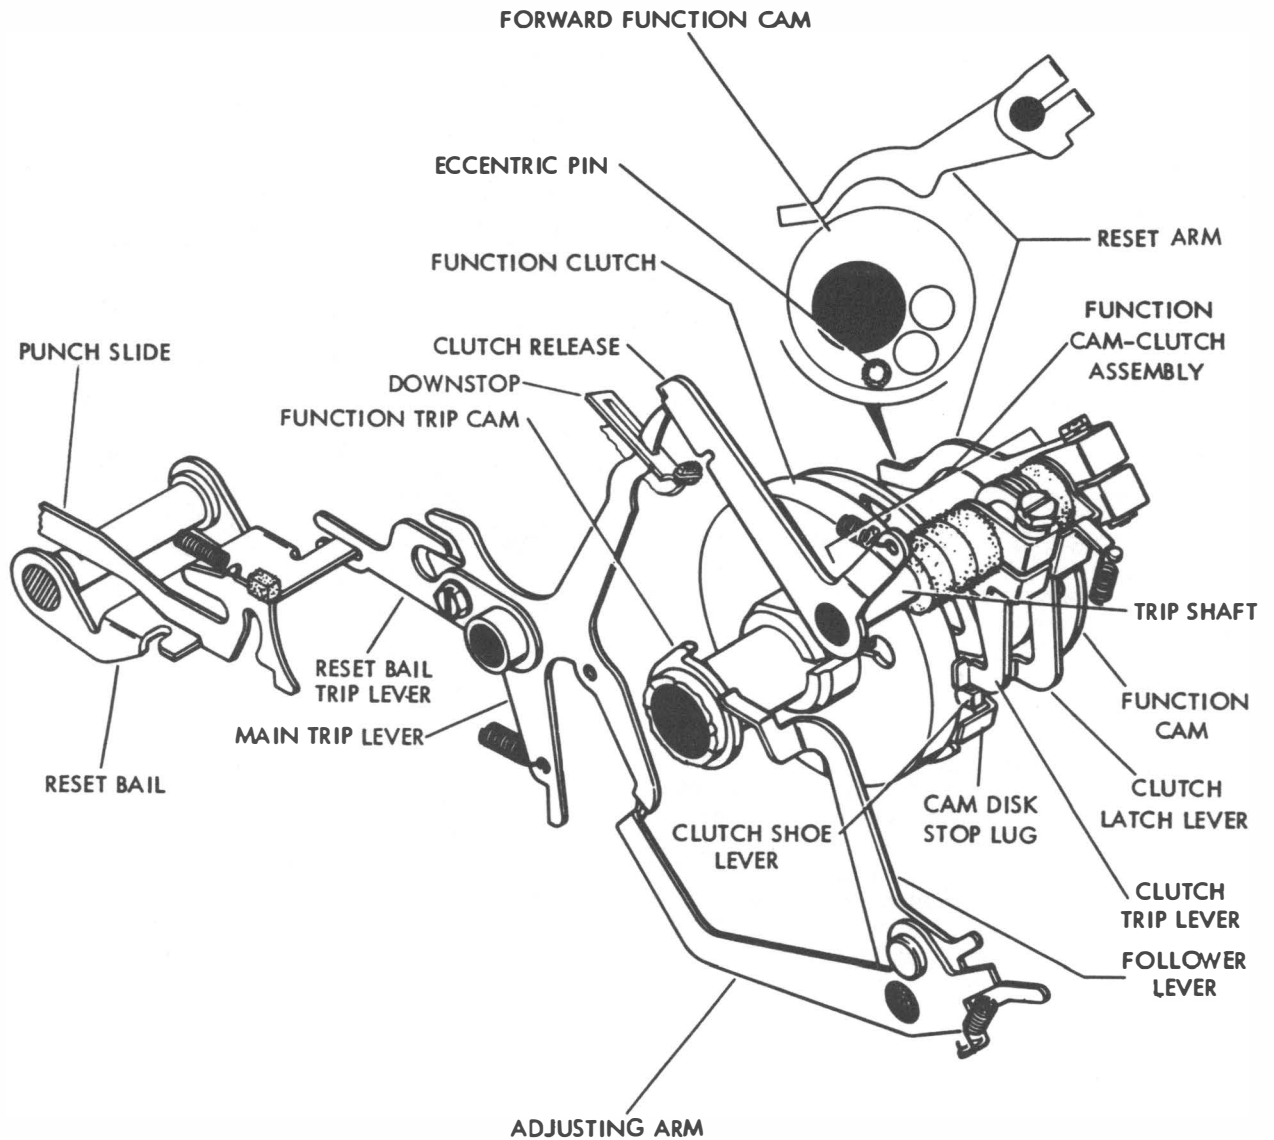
Function Cam-Clutch and Clutch Trip Assembly
